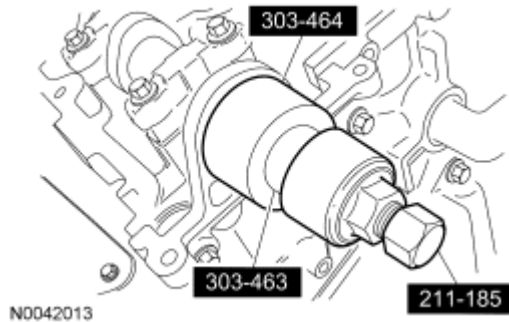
Identifying Special Tools (303-463, 303-464 And 211-185)
